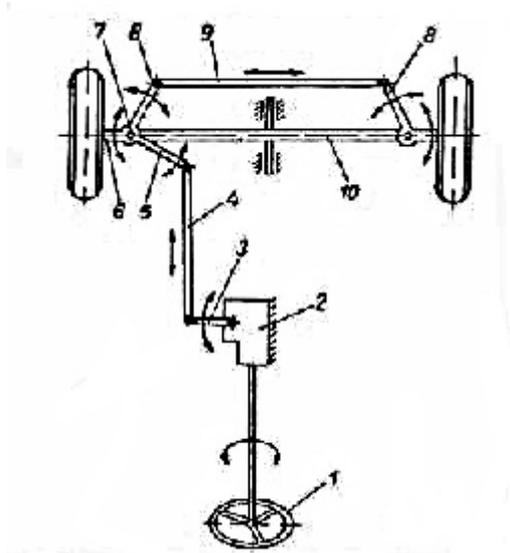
The general scheme of a steering. 1 wheel, 2 steering (steering box) 3-lever box, 4-bar longitudinal direction; 5 lever spindle, 6 spindle, 7-pin, 8-lever, 9th cross bar, 10 -beam front axle.
